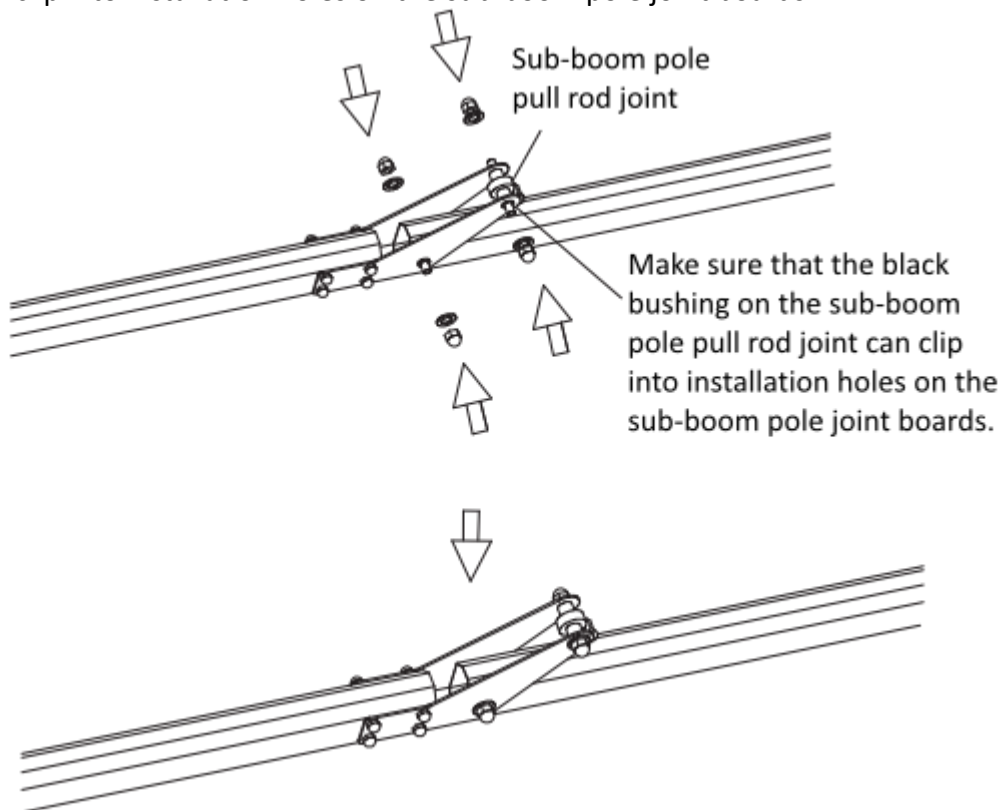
Install Sub-Boom Pole Pull Rod Joint
